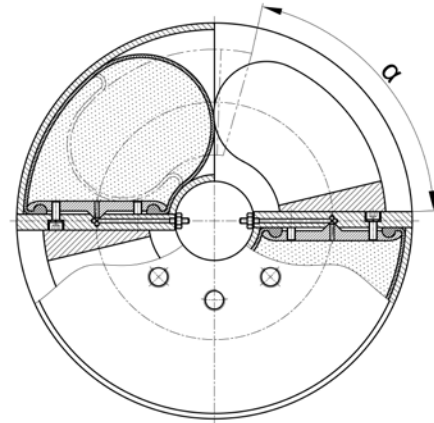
The maximum twist angle of the piston pneumatic flexible shaft coupling type 2-1/110-P-C
